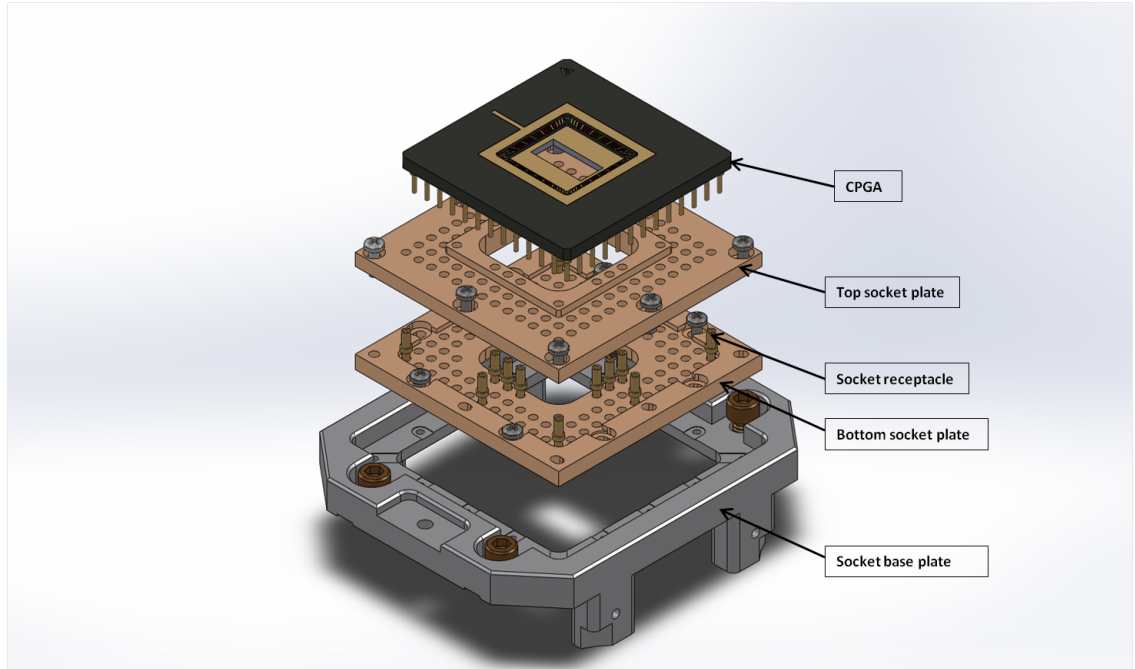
A 3D CAD drawing of the socket assembly and its components in exploded view. Socket plates, receptacles, socket base plate and CPGA are shown. All the parts except receptacles and CPGA are designed in-house.
